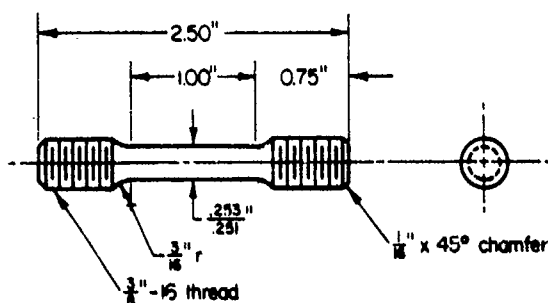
Subsize tensile specimen (short transverse) for 7149-T73 hand forging.
